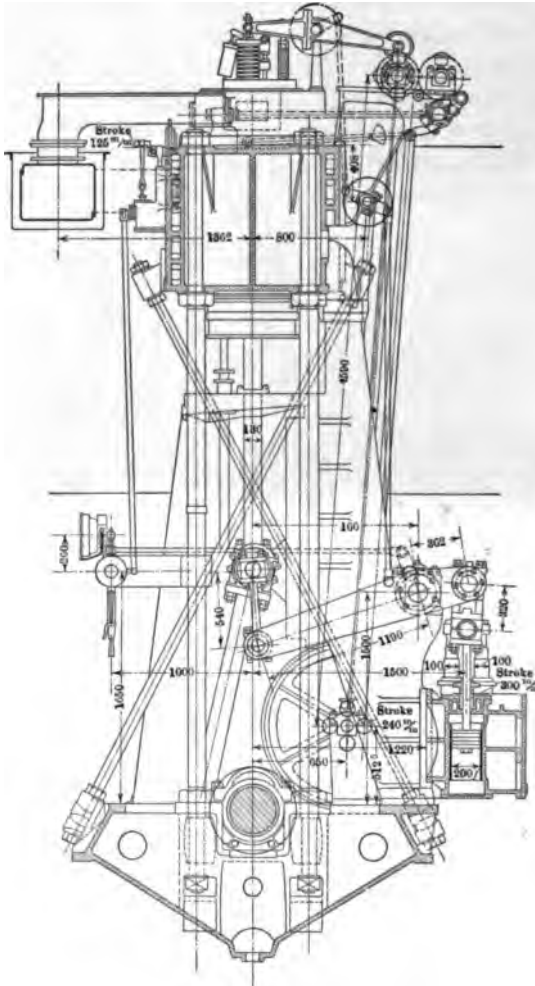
Werkspoor 1100 b.hp. marine Diesel engine.
